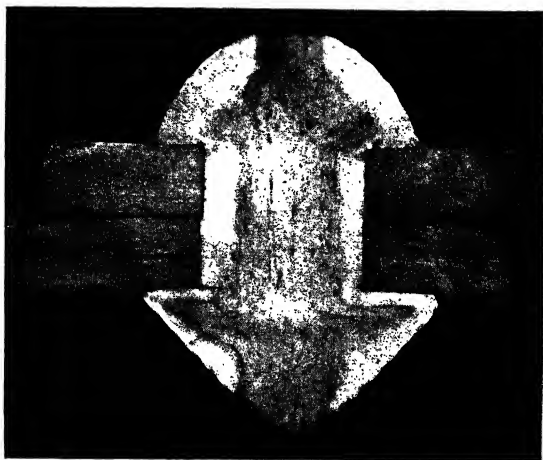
DEEPLY ETCHED SECTION OF A RIVETED JOINT TAKEN FROM A CON-
